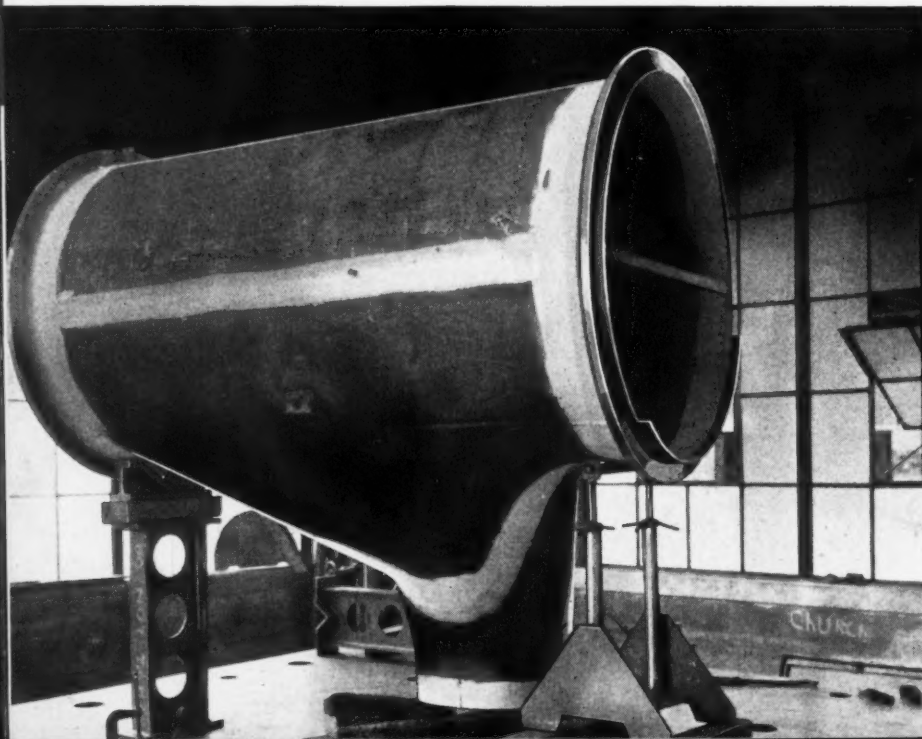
A Condenser Shell Entirely Prefabricated by Welding, Using Six Pieces of Boiler Plate. Note Double Curvature of Pieces in Lower Section. These Curved Pieces Require Careful Preforming
